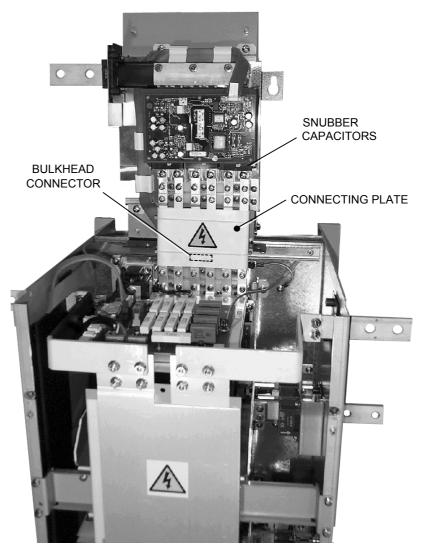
Front View of Exhaust Duct/Brake Unit/Drive Assembly showing the Brake Connecting Plate and Snubber Capacitors fitted
